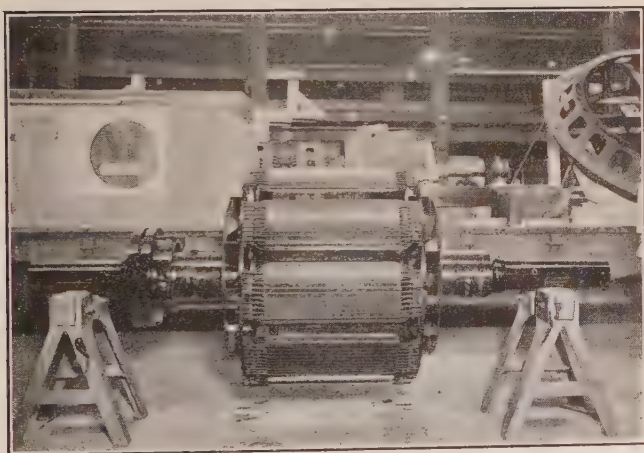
ROTOR OF 5000 KV-A., 11,000-VOLT, 60-CYCLE, 720-REV. PER MIN. SYNCHRONOUS CONDENSER WITH WELDED DAMPER WINDING
